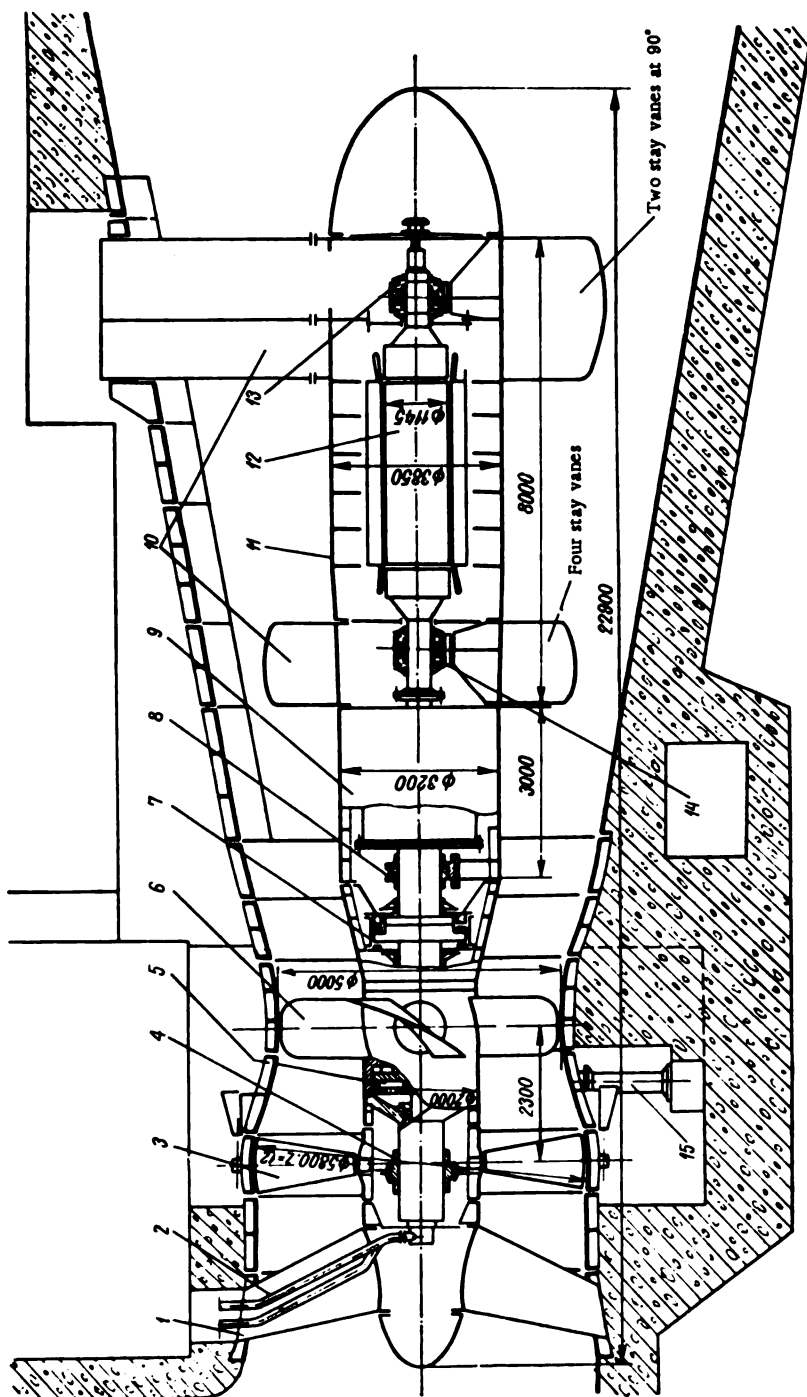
Sectional view of a tubular unit with multiplying gear ($N = 27,000$ kw and $D_1 = 5.0$ m)
